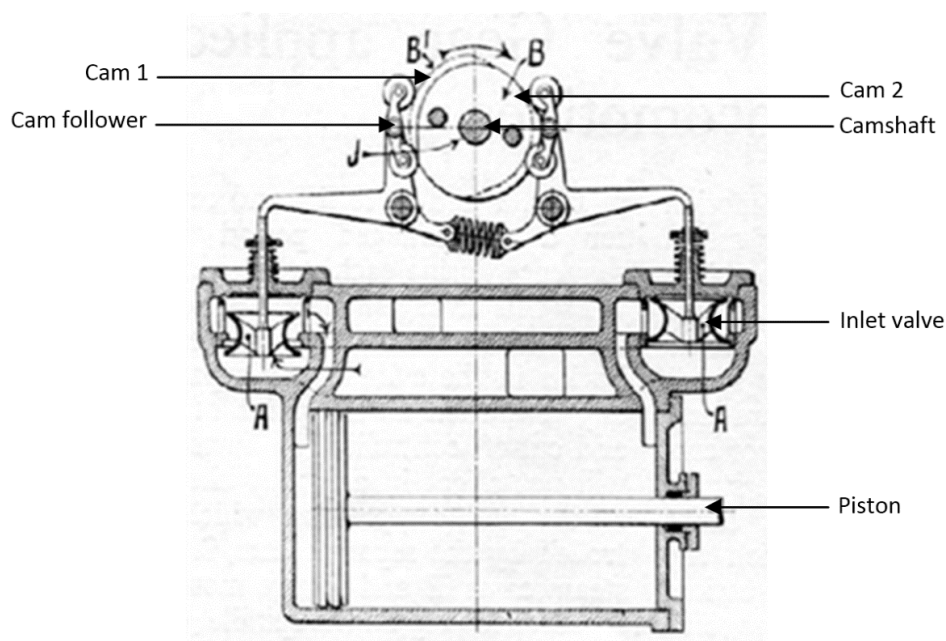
Caprotti valve gear (Caprotti, 1925)
